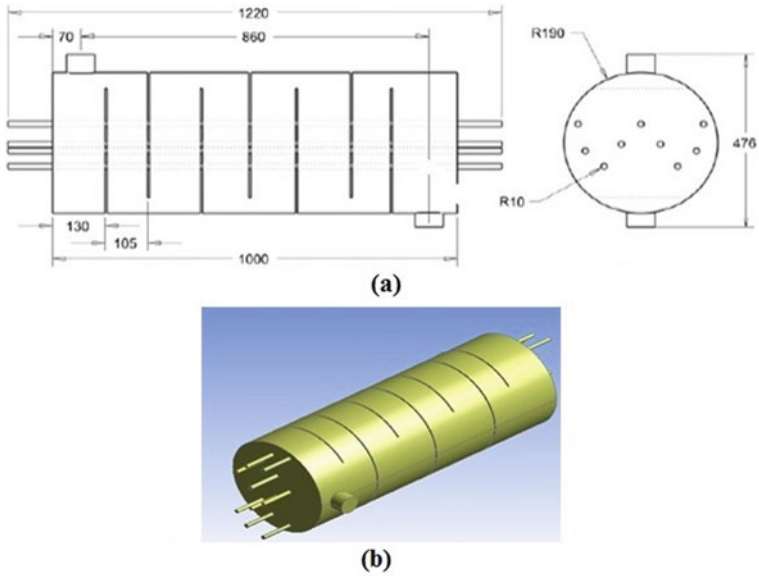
a Front view and side view of zig-zag pattern, b 3D-view of STHE with Zig-zag pattern
